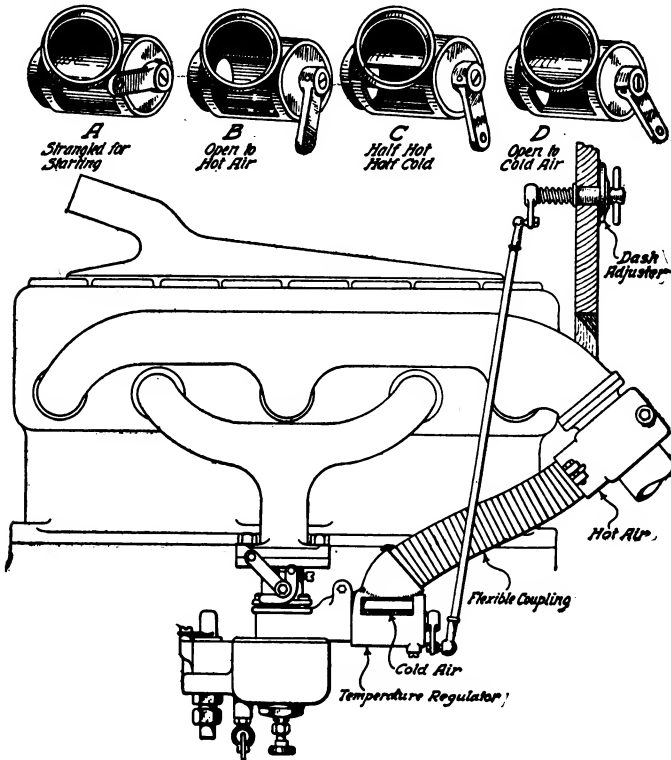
Holley Temperature Regulator Attached to Carburetor
